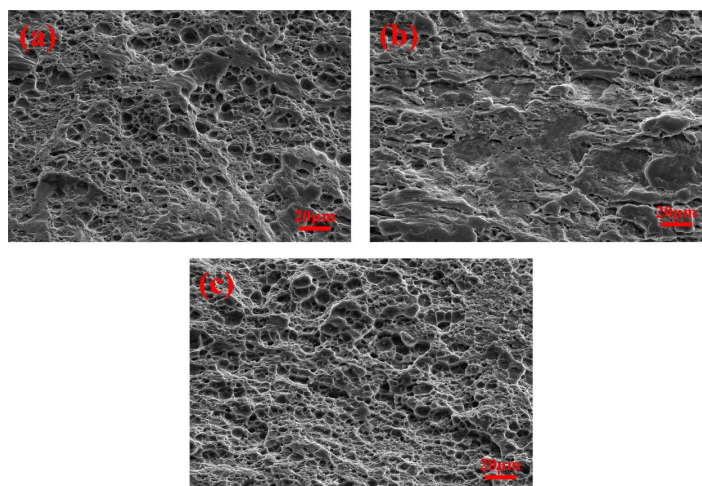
The slow tensile fracture morphology of the samples with silicon oil: (a) CMT; (b) TIG; (c) FSW
